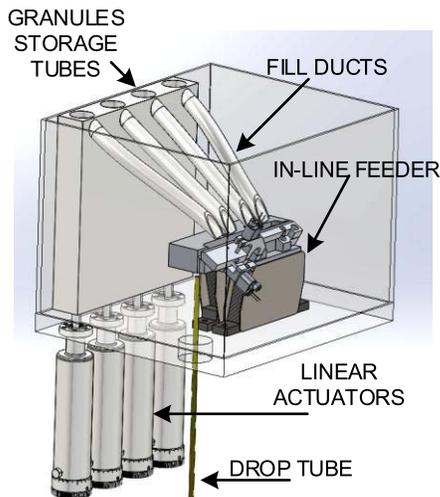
In-line feeder vacuum assembly design with four material reloading capabilities without a vacuum cycle.
